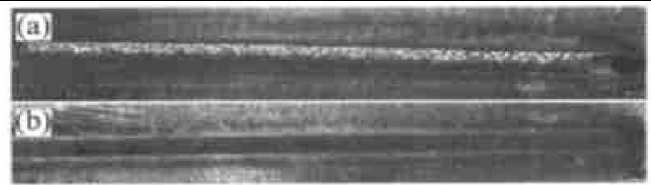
Weld seam formation of 10 mm thick stainless work piece
